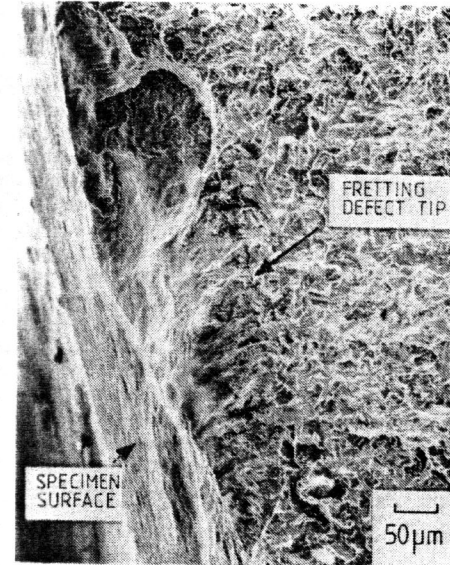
Small Fretting Defect Broken Open by Brittle Fracture
